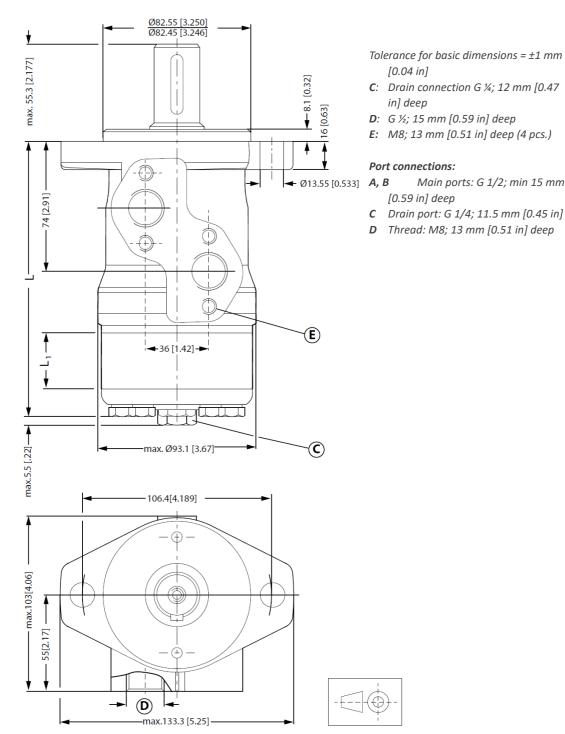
OMP Side port offset with A2-flange with drain connection (EU version)
